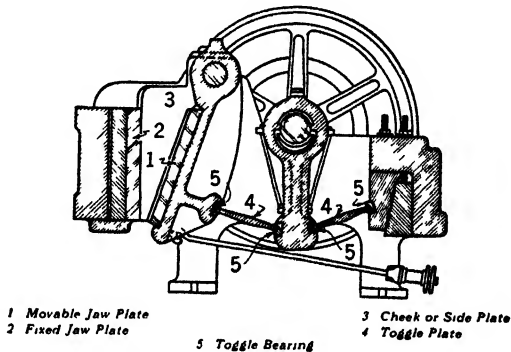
Section Through a Blake-Type Jaw Crusher.
